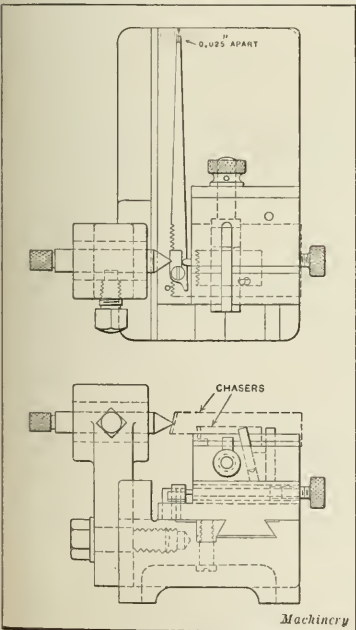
Fixture for testing Straightness of Opening Die Chasers
